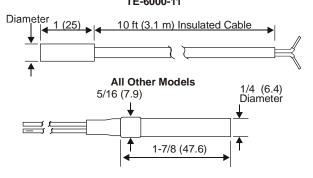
TE-6000 Dimensions, in. (mm), except where Indicated
